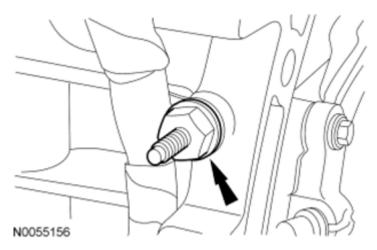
Locating Wiring Harness Grommet Courtesy of FORD MOTOR CO.
